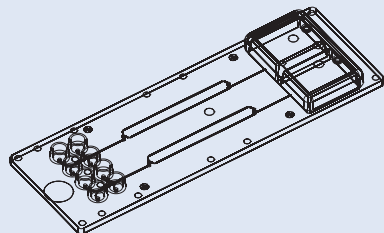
Schematic drawing of a straight channel chip with waste chamber 0272 to be equipped with double-sided adhesive tape
